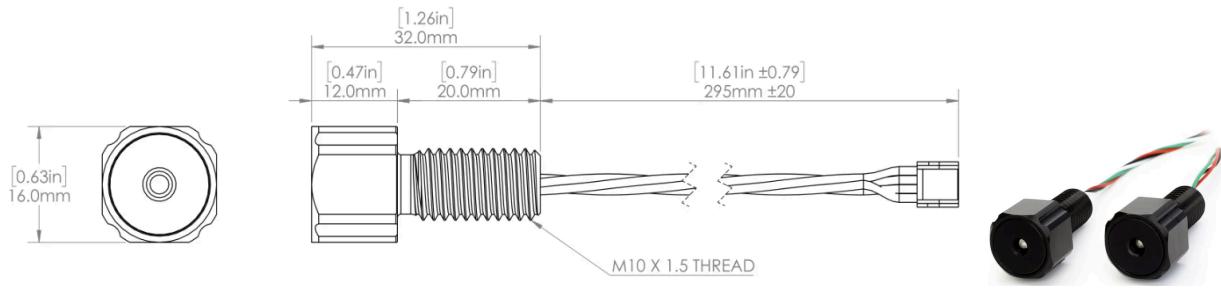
Figure X: Mechanical dimensions and external appearance of the depth and pressure sensor housing and cable
